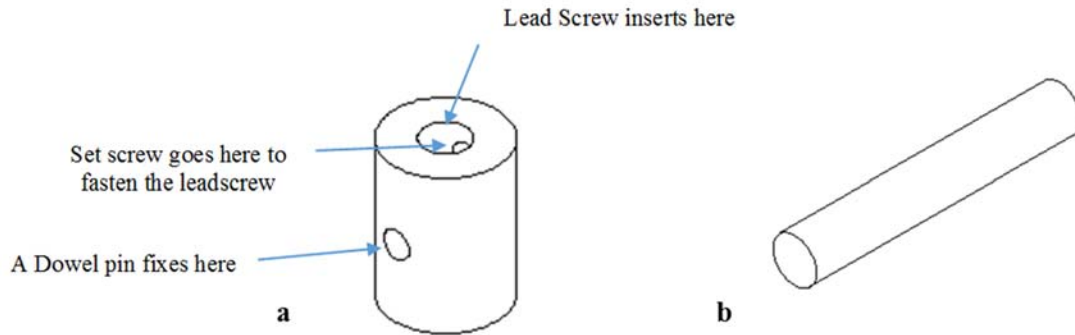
a) Lead screw holder. Dowel pin inserts into the radial hole shown on the left. b) Dowel pin.
